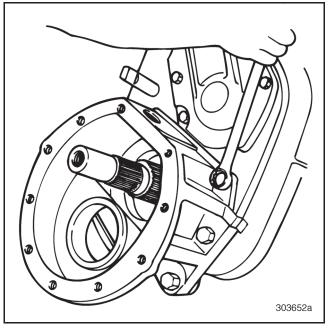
Removing Front-Drive Housing Capscrews and Dowel Bolts
